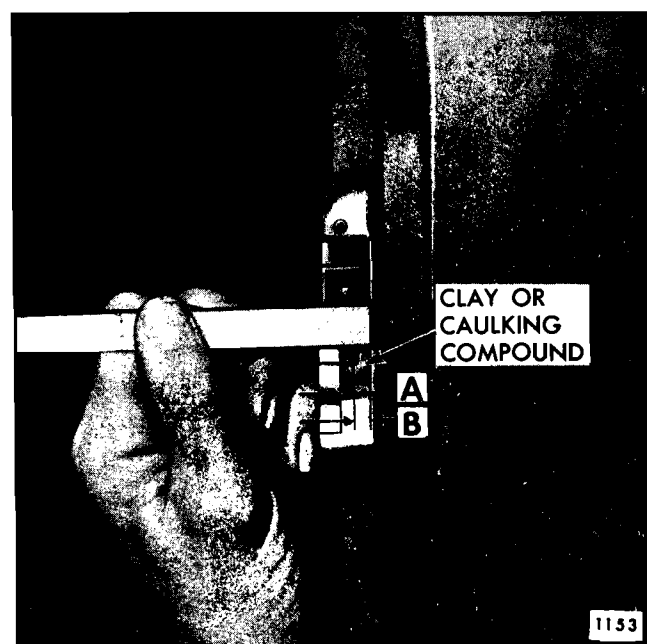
Tail Gate Lock Striker Caulking Check
